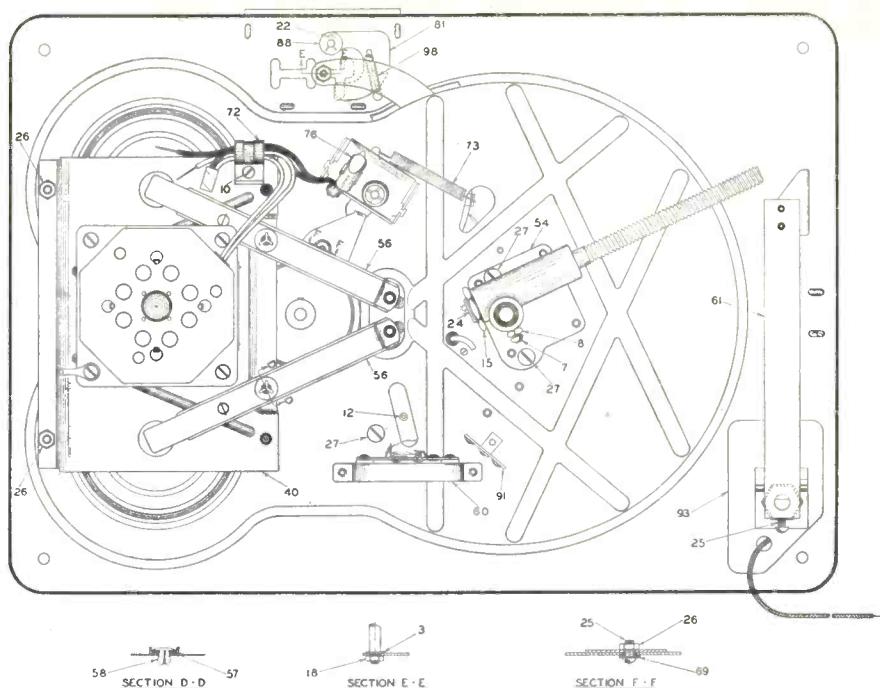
Bottom view of General Industries recorder. Section views are indicated.
